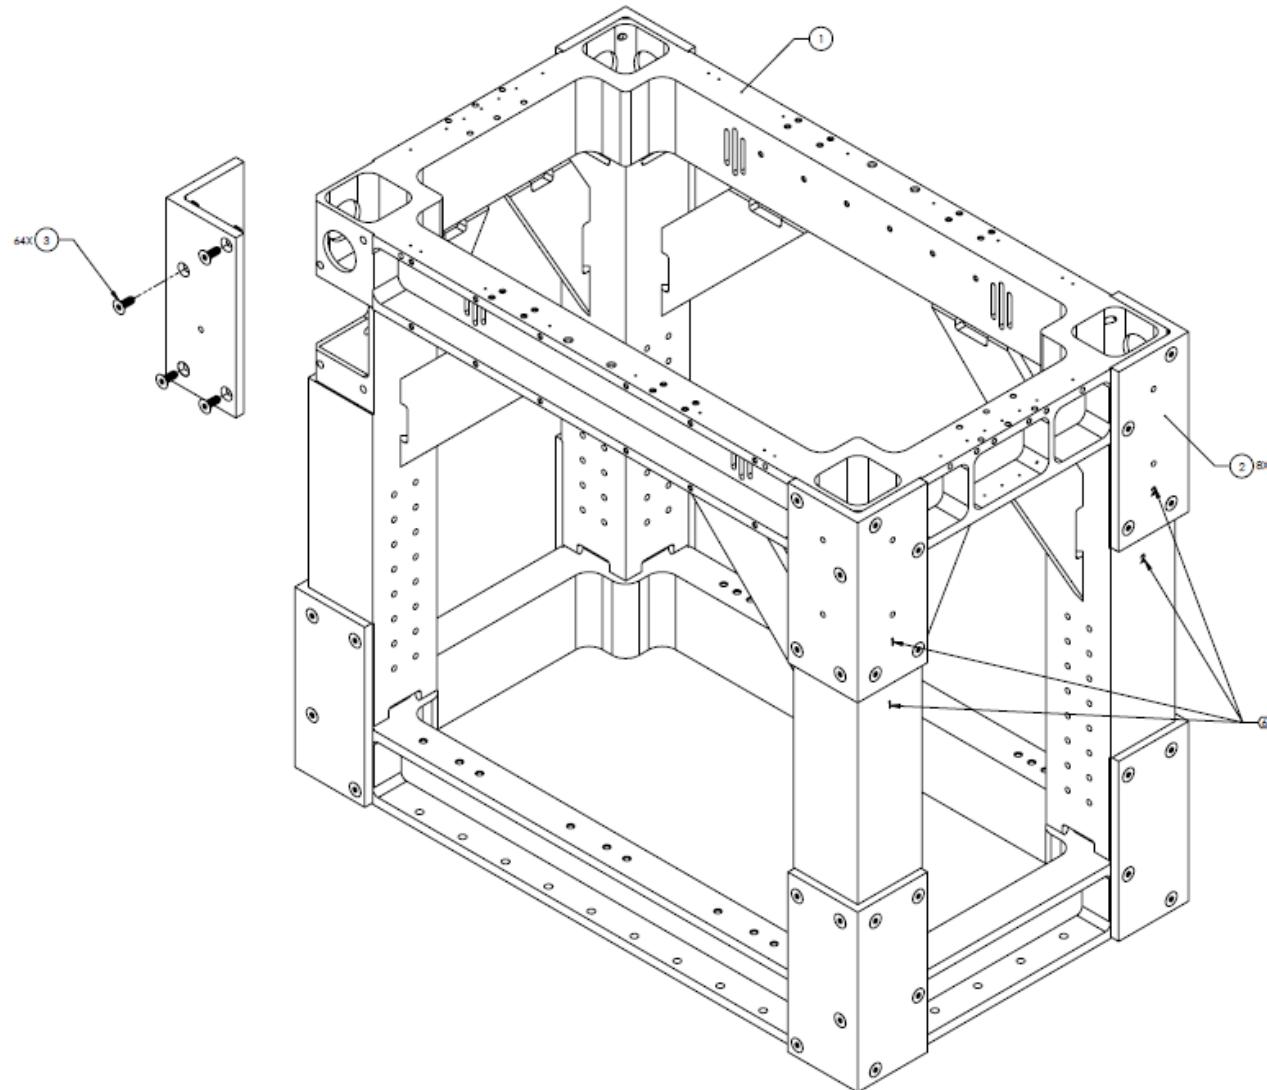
2.16 D0900655 Structural Weldment Assy, OMC
